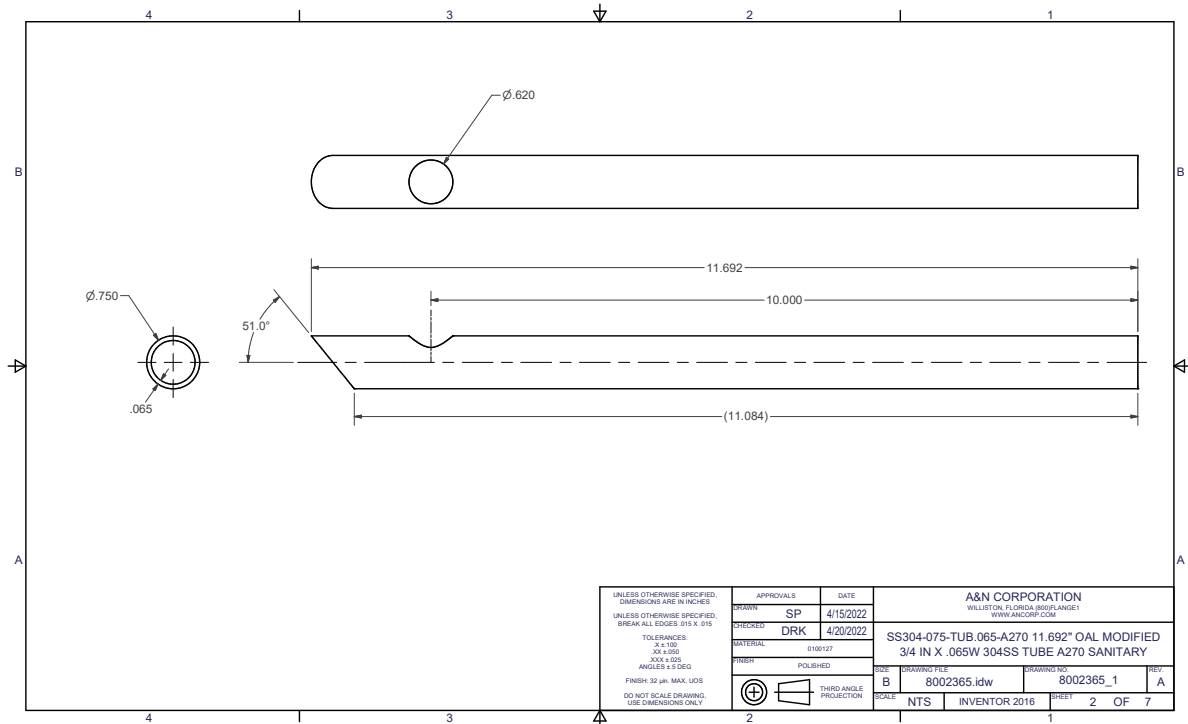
ANCORP Drawing 8002365 Rev A, Page 2
